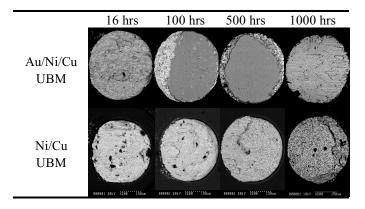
SEM fractographs observed on the sheared surface of the 63Sn-37Pb solder bumps of 0.620 mm size which were aged for different times.
